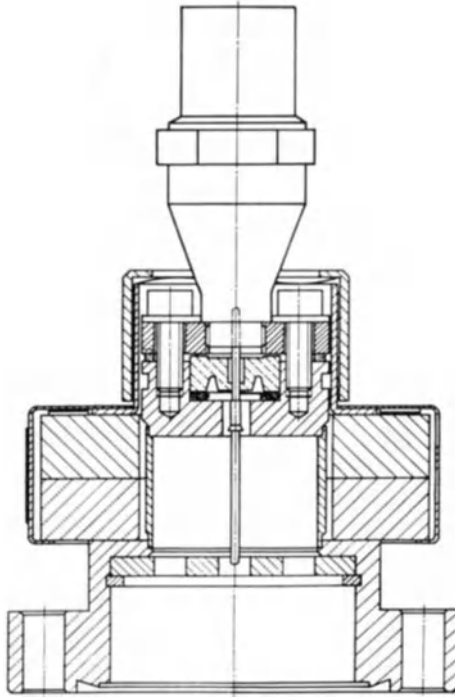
Drawing, in cross-section, of the Balzers IKR020 inverted magnetron gauge.
